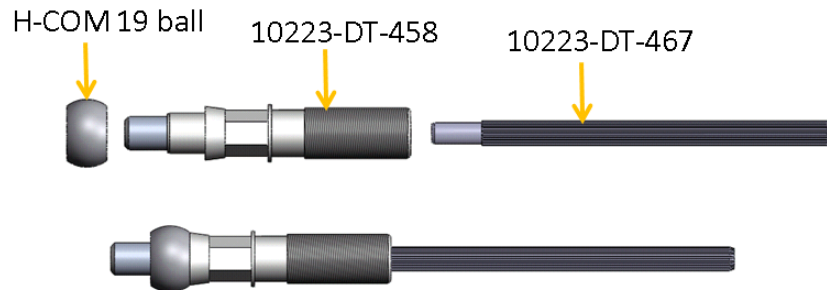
The first two steps in assembling the lower bi-pod assembly are shown [24].
